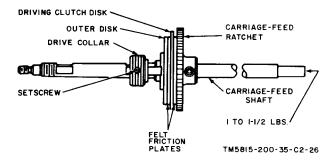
Carriage-feed shaft drive collar adjustment.
